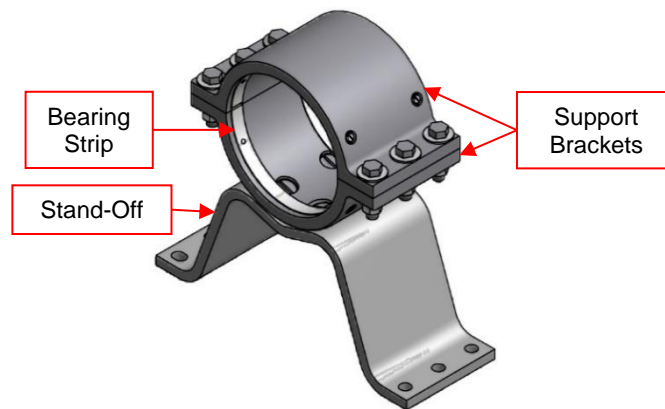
External Support Bracket (P/N: 4443601 Shown)
